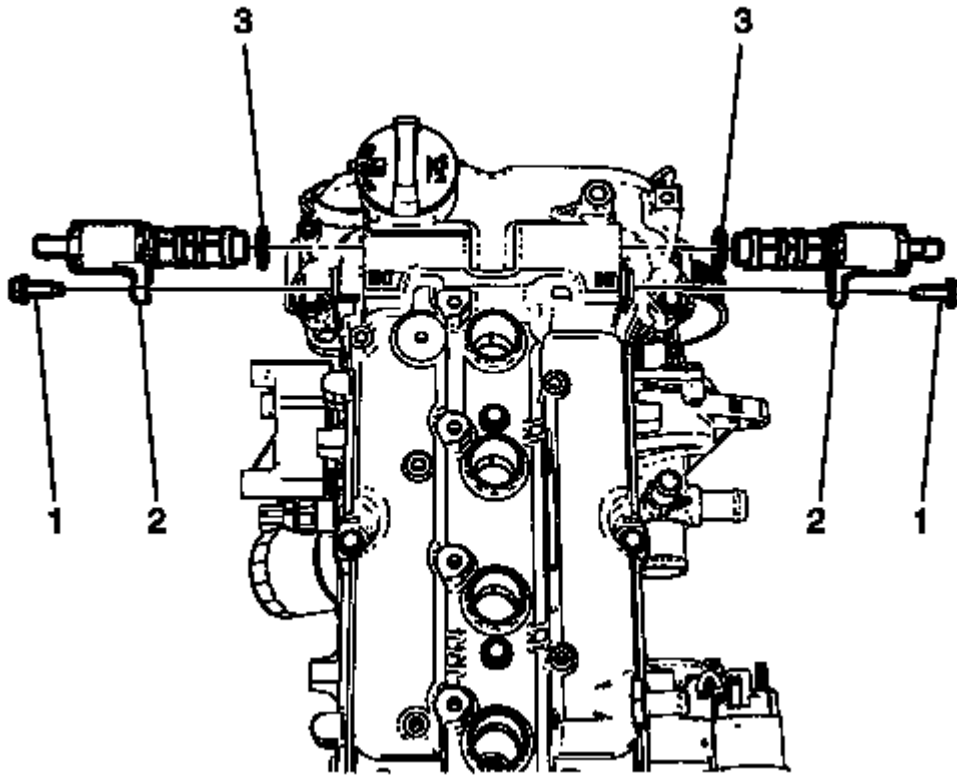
Camshaft Position Actuator Solenoid Valve Bolts And Valves
